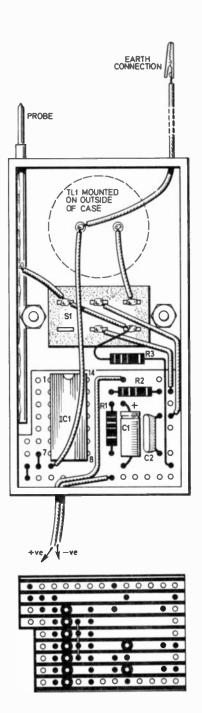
The layout of the components on the Veroboard, cut-outs to be made and full wiring up details.
